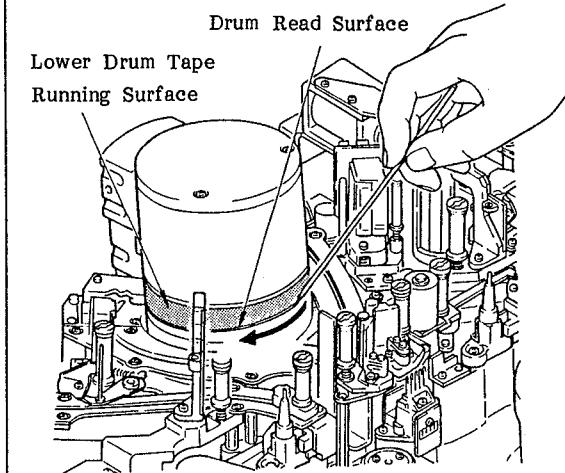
Cleaning the Lower Drum Read Surface and the Tape Running Surface
